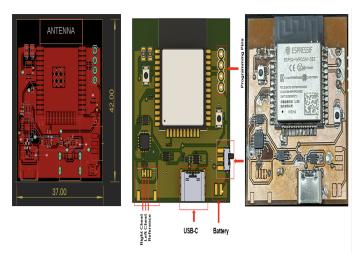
(a) PCB Layout (b) 3D Model (c) Assembled Device
